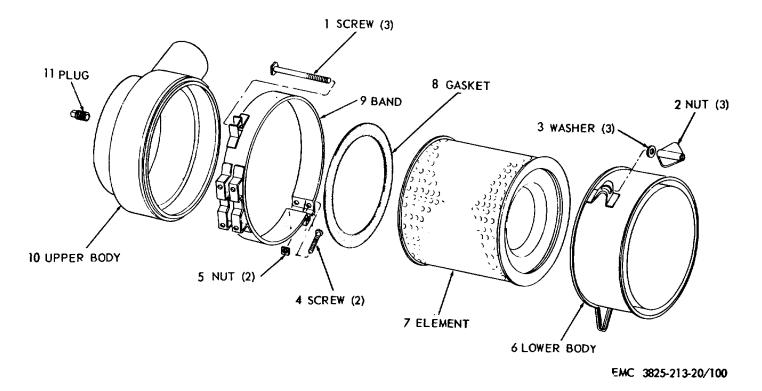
Plow and carrier engine air cleaner assembly, disassembly and reassembly, exploded view.
